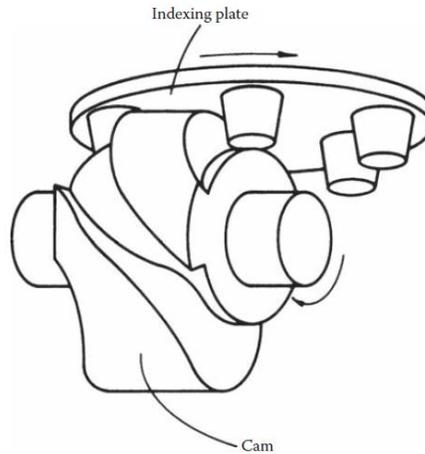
(e) CROSSOVER CAM TYPE INDEXING MECHANISM
